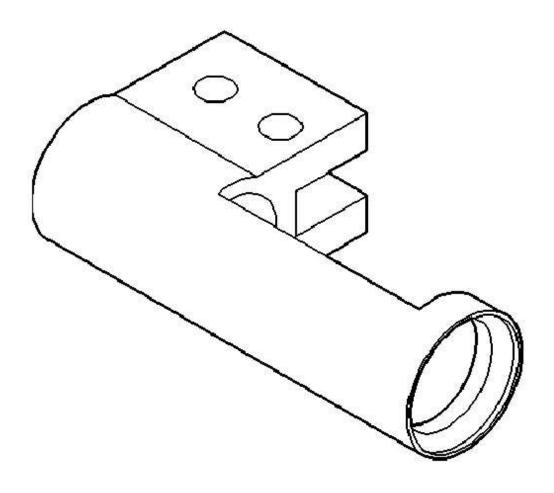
Valve Spring Adapter 6526 Courtesy of CHRYSLER LLC
